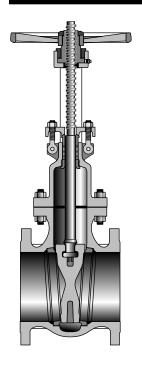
Flanged Figure 47½ Butt Weld
